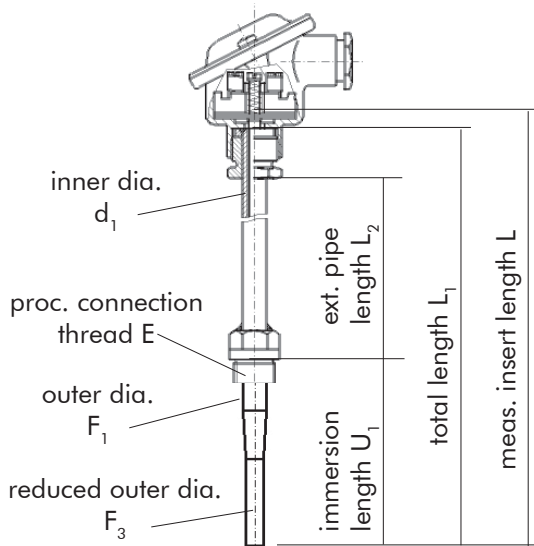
Thermocouple and resistance thermometer with protection tube form 3G
